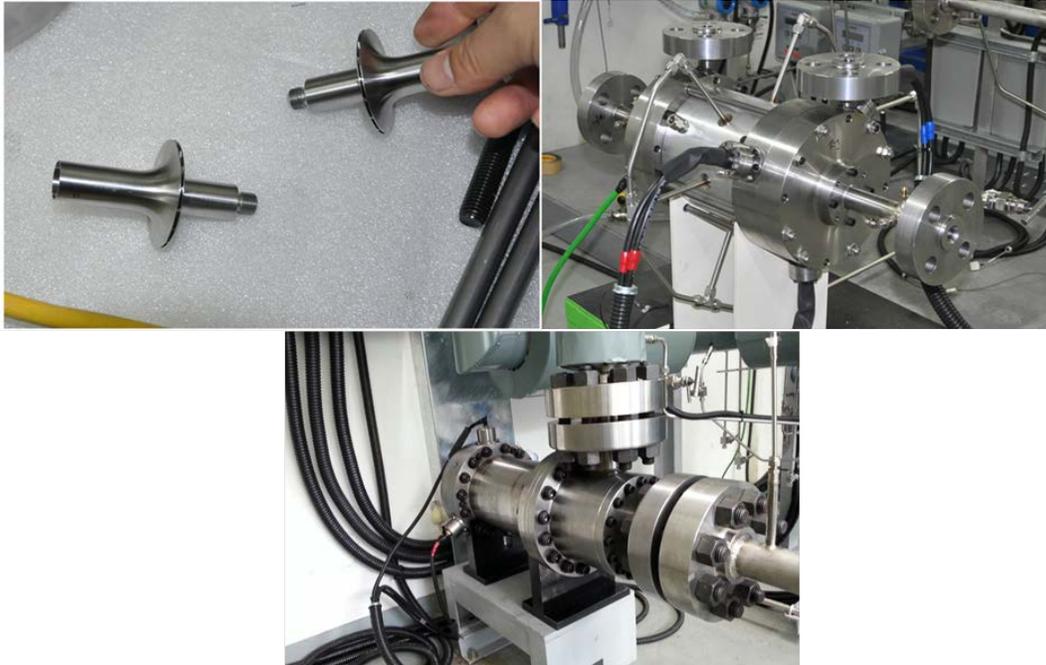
Shrouded impeller (upper left), compressor assembly (upper right), and turbine assembly (bottom)
